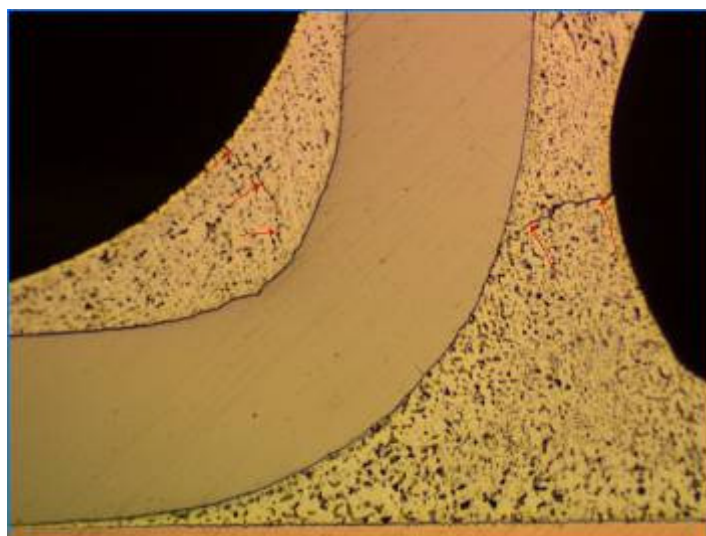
cross section, SN61, U62, left lead, solder crack, 200x
